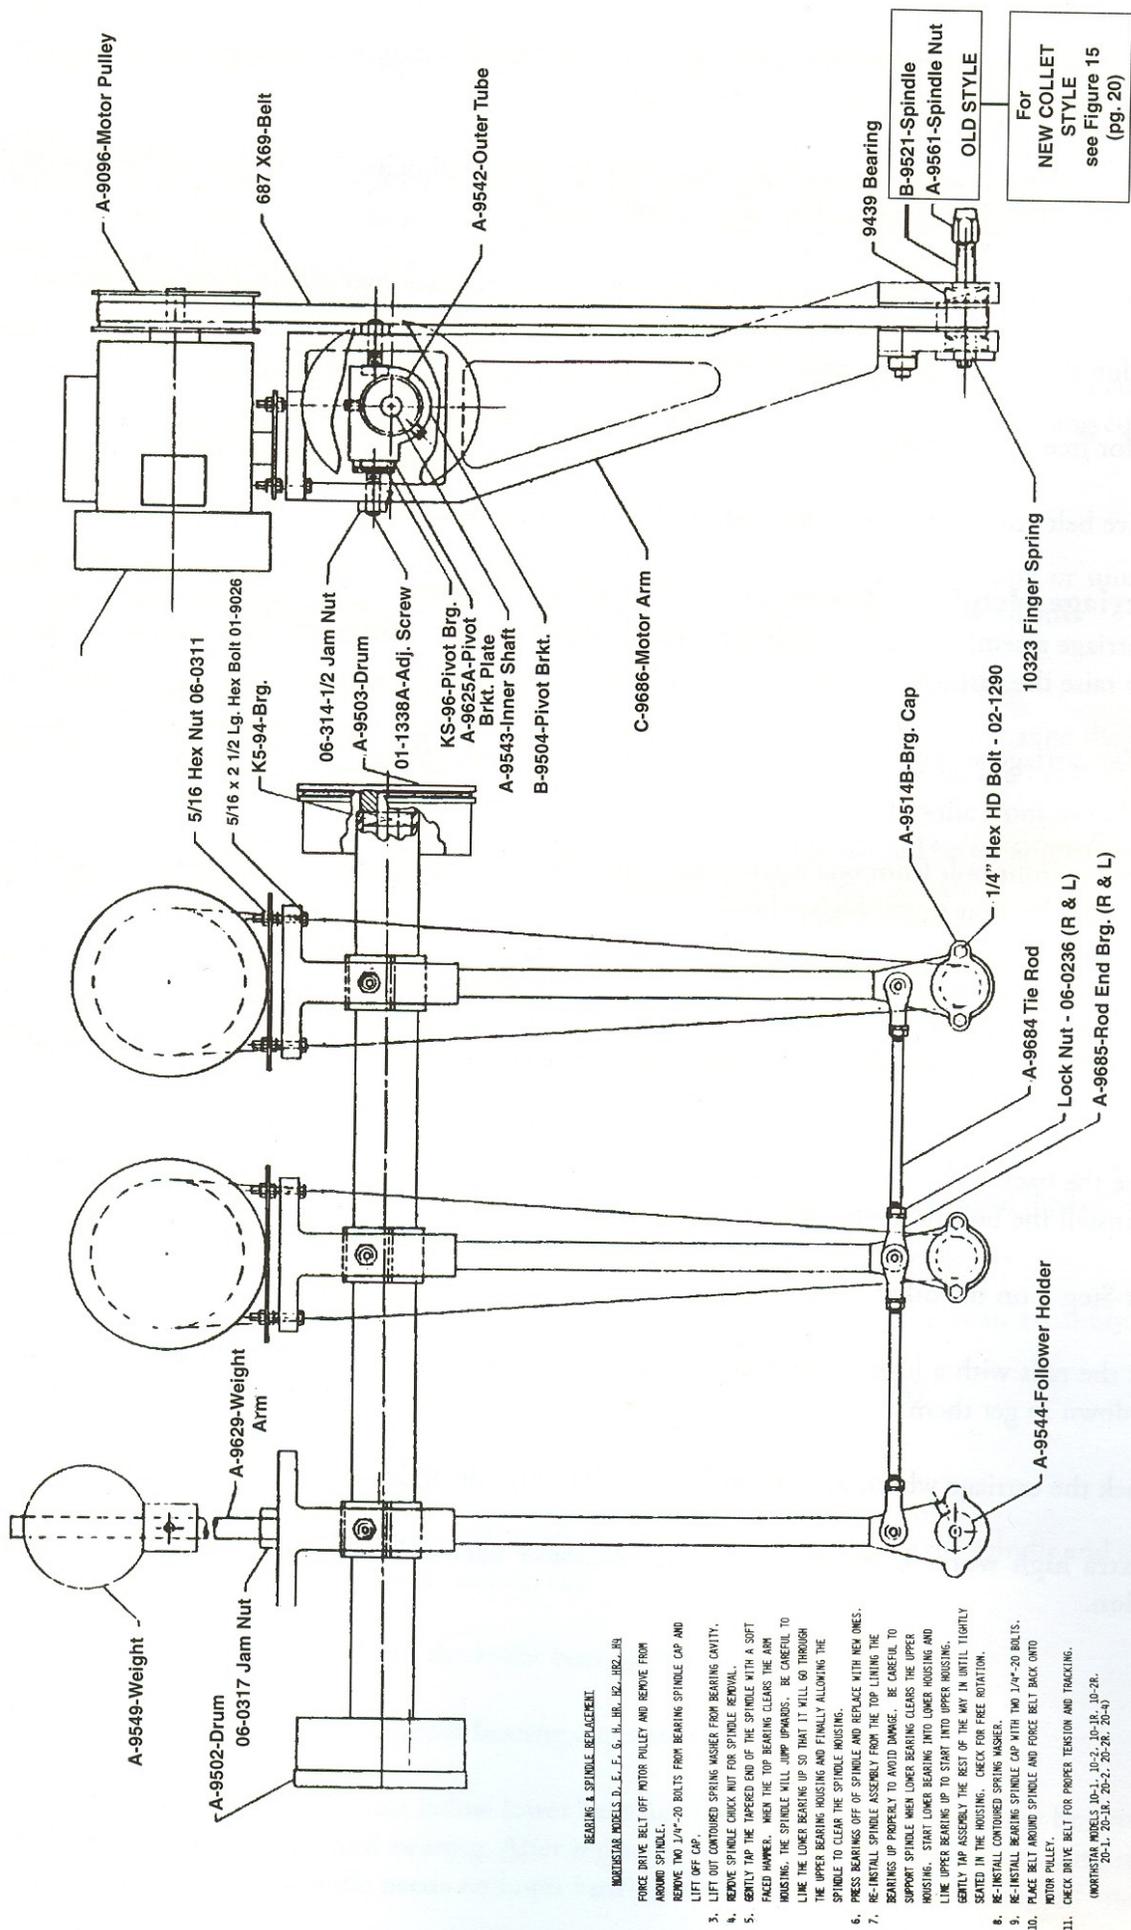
Motor Arm and Spindle Assembly Northstar (non-cutter bar style)
